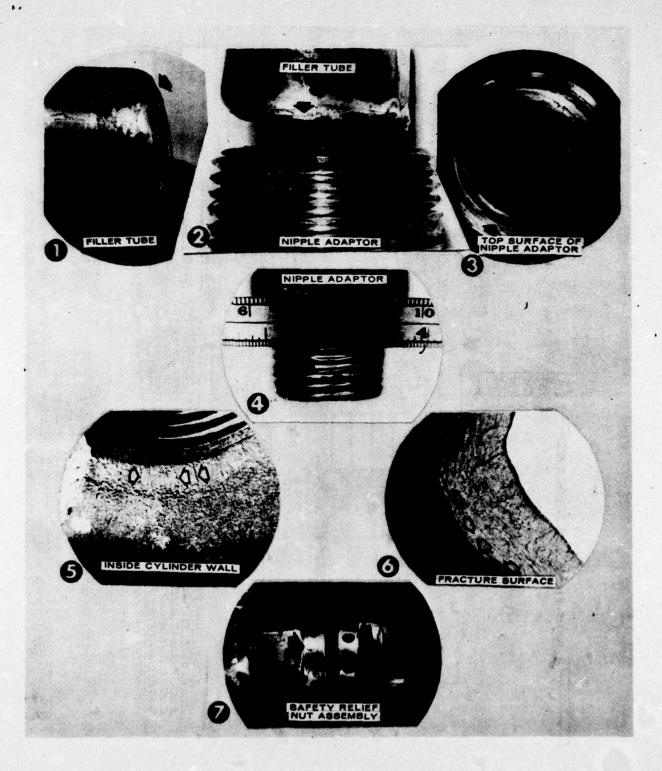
Detailed Photos of the Exploded G-276 Sampler
